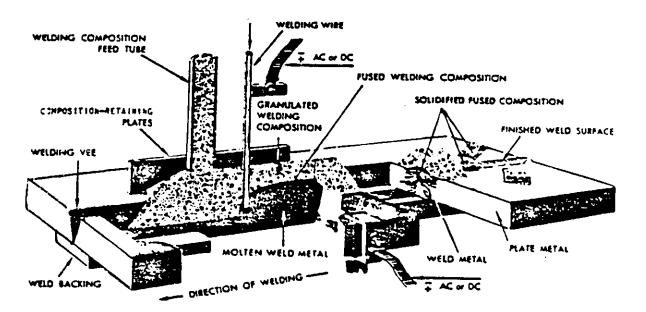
SUBMERGED ARC WELDING PROCESS
